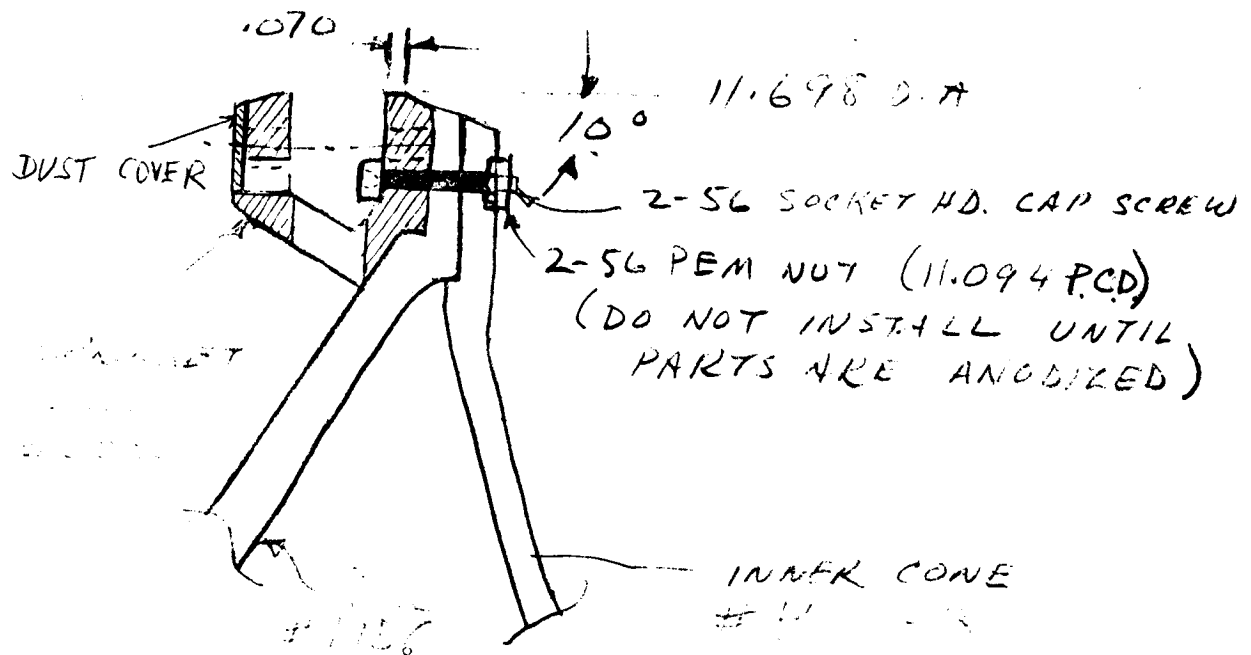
Assembly Details of Sprocket Ring-Drive Drum Interface
